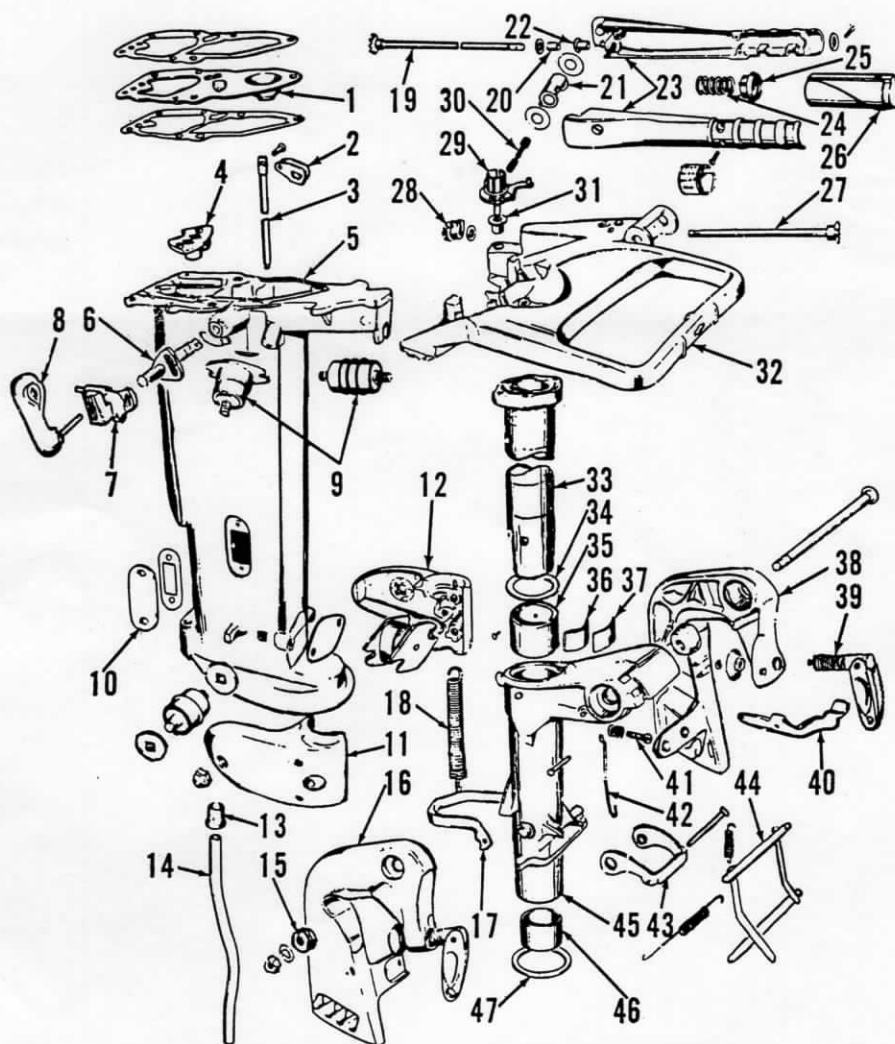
Exploded view of stern bracket, exhaust housing, drive shaft housing and associated parts used on 1959 production 12 horsepower models. Other models are similar.
